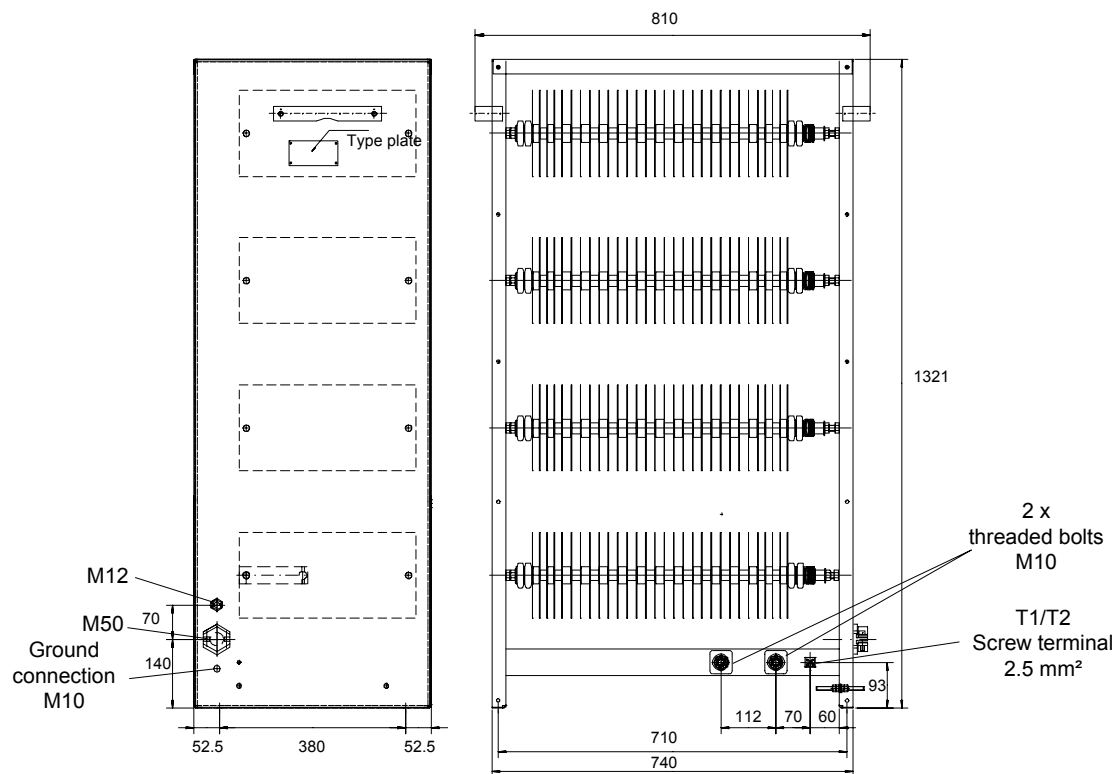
Dimension drawing of the braking resistor (50 kW / 250 kW)
